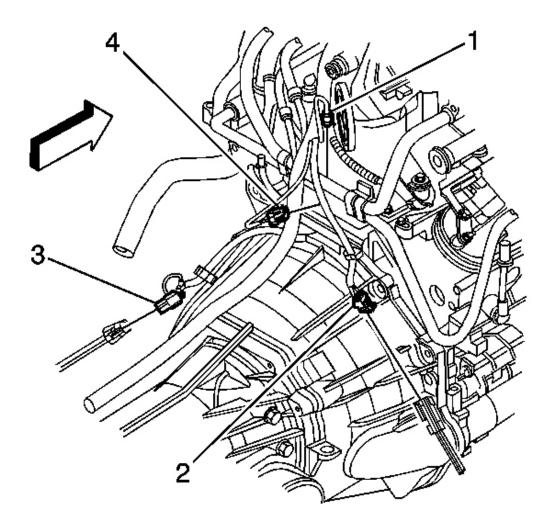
Locating Components Connectors At Rear Of Engine Courtesy of GENERAL MOTORS CORP.
